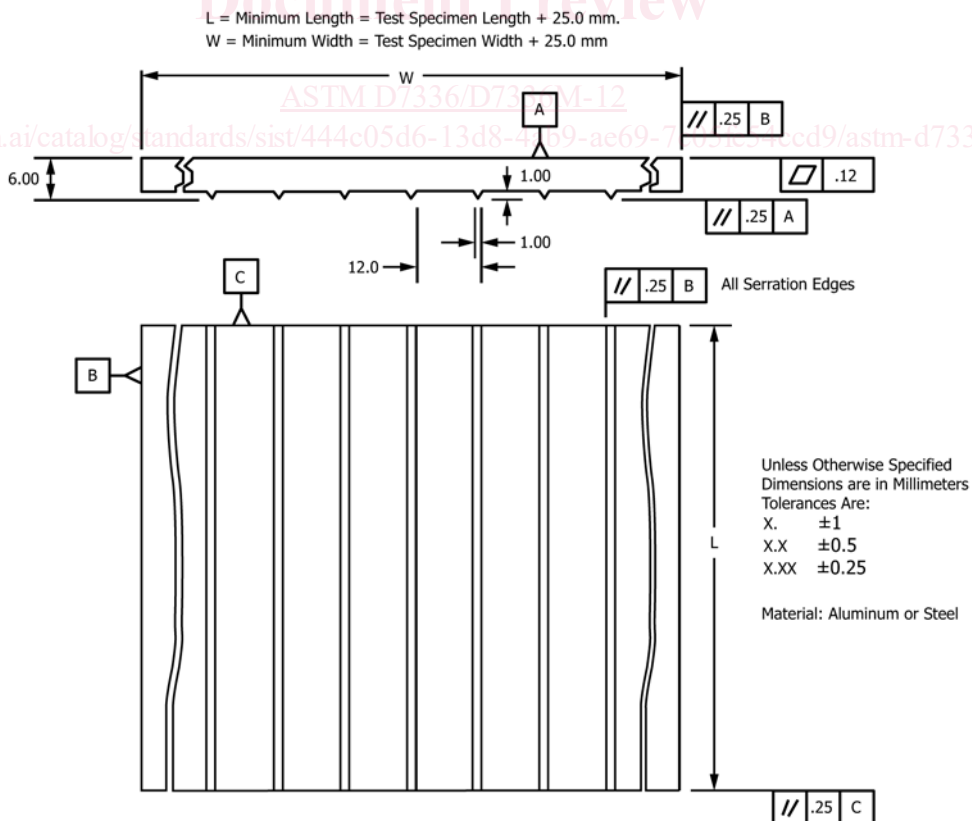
Representative Serrated Plate for Honeycomb Core Material Pre-Crushing (SI Version)
